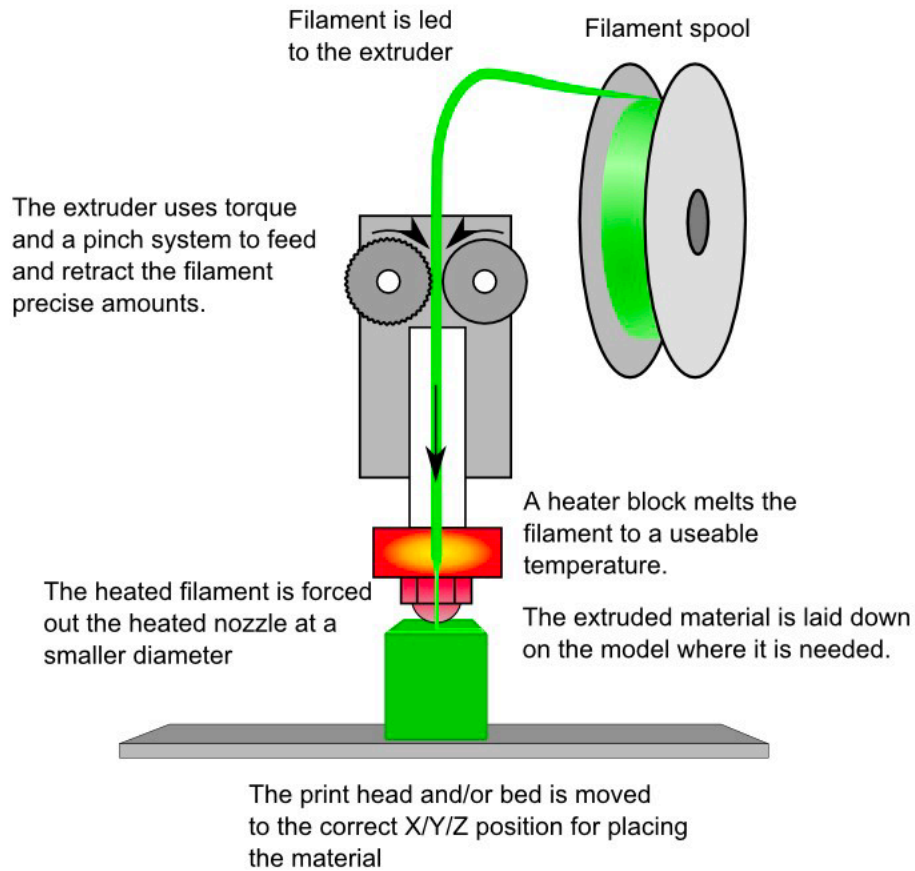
Illustration of the mechanism behind a fused filament fabrication 3D printer.
